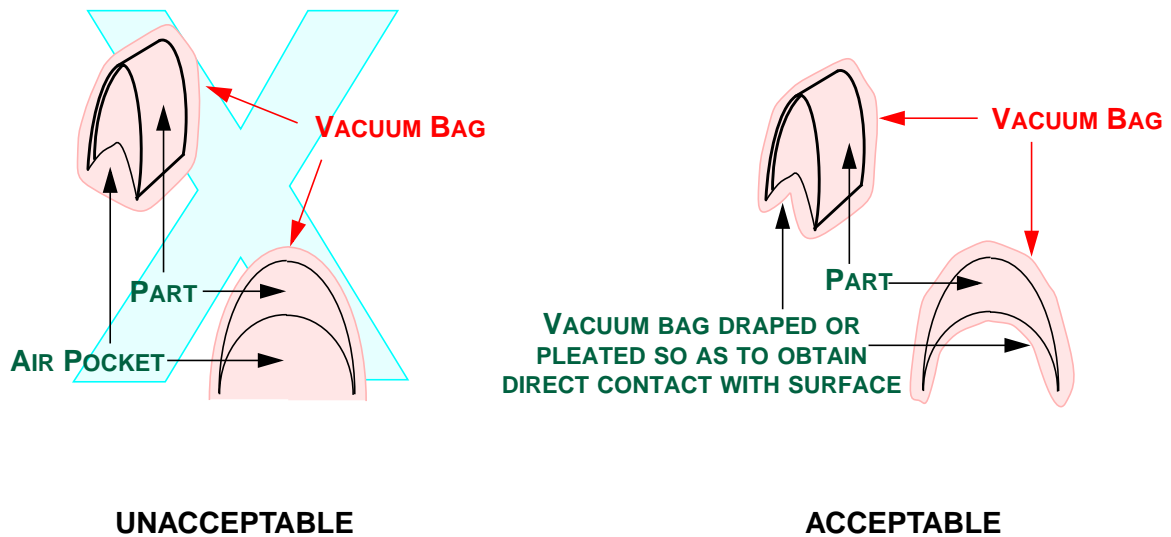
VACUUM BAGGING ENTIRE PARTS
